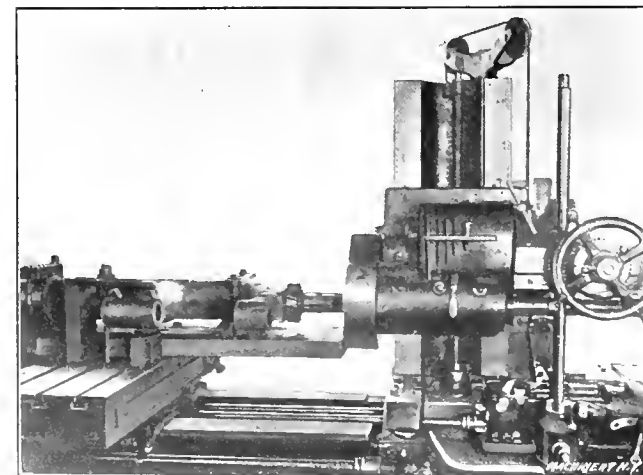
Milling the Top of a Column for the Gear-box on a Horizontal Boring Machine
